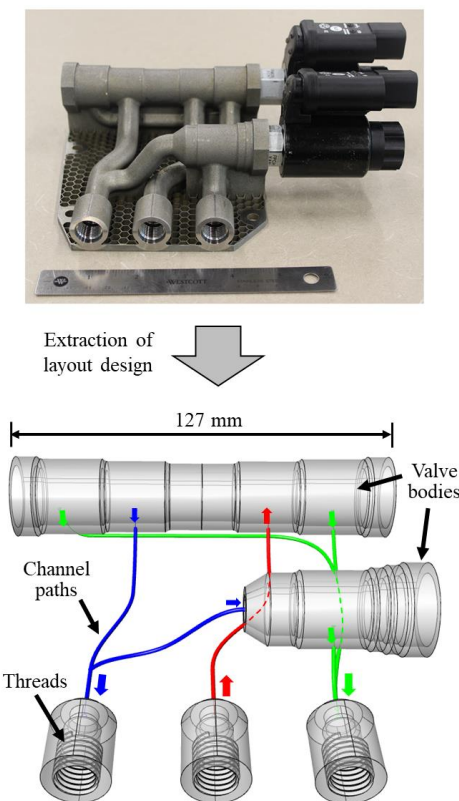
Layout design extracted from original hydraulic manifold part presented in [26].
